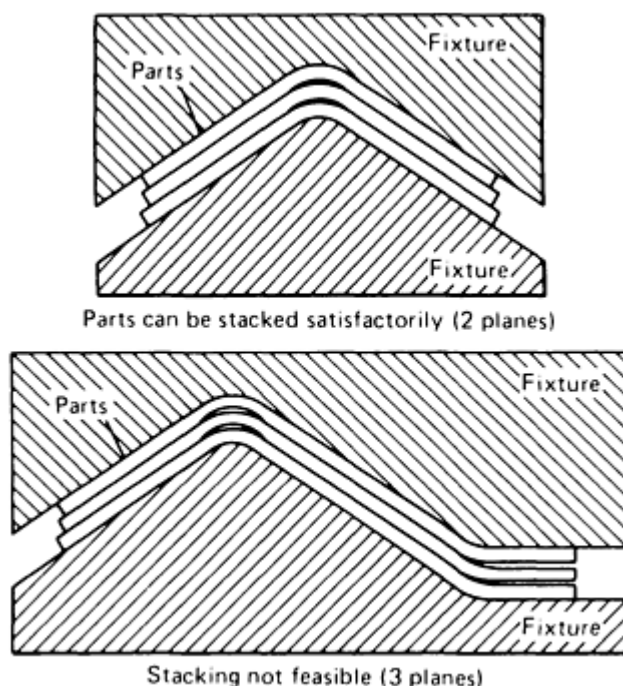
Parts that can and those that cannot be stacked in fixtures for the control of dimensional tolerances during aging
